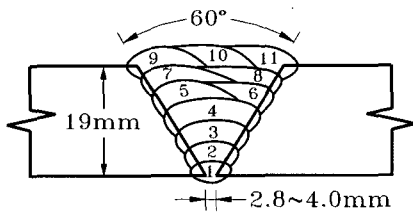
Schematic diagram of specimen and welding procedure.
